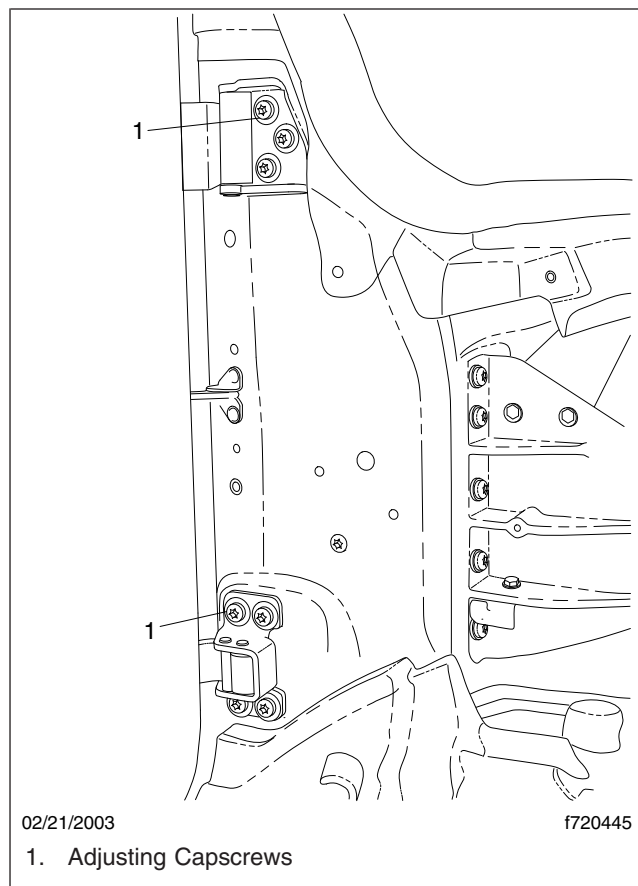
, Fore-and-Aft and Up-and-Down Adjusting Capscrews on the Cab
